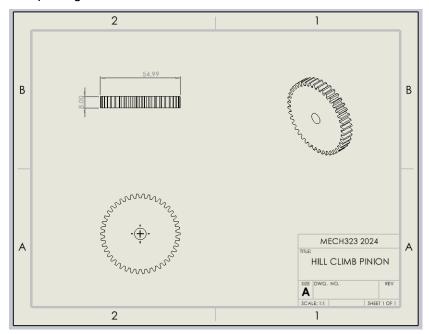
CAD drawing of the pinion component of the hill climb gear pairing.
